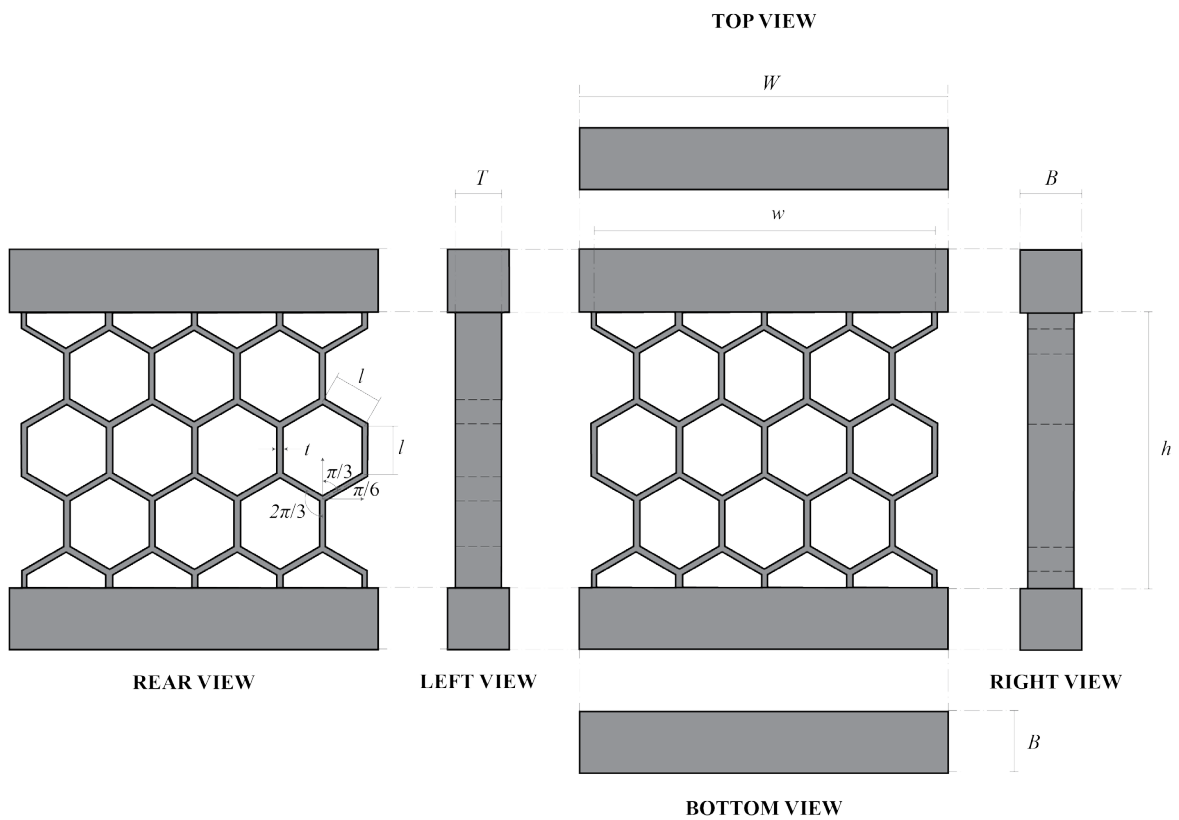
Technical drawing of the un-fulleted hexagonal honeycomb specimen, employing the American projection convention
